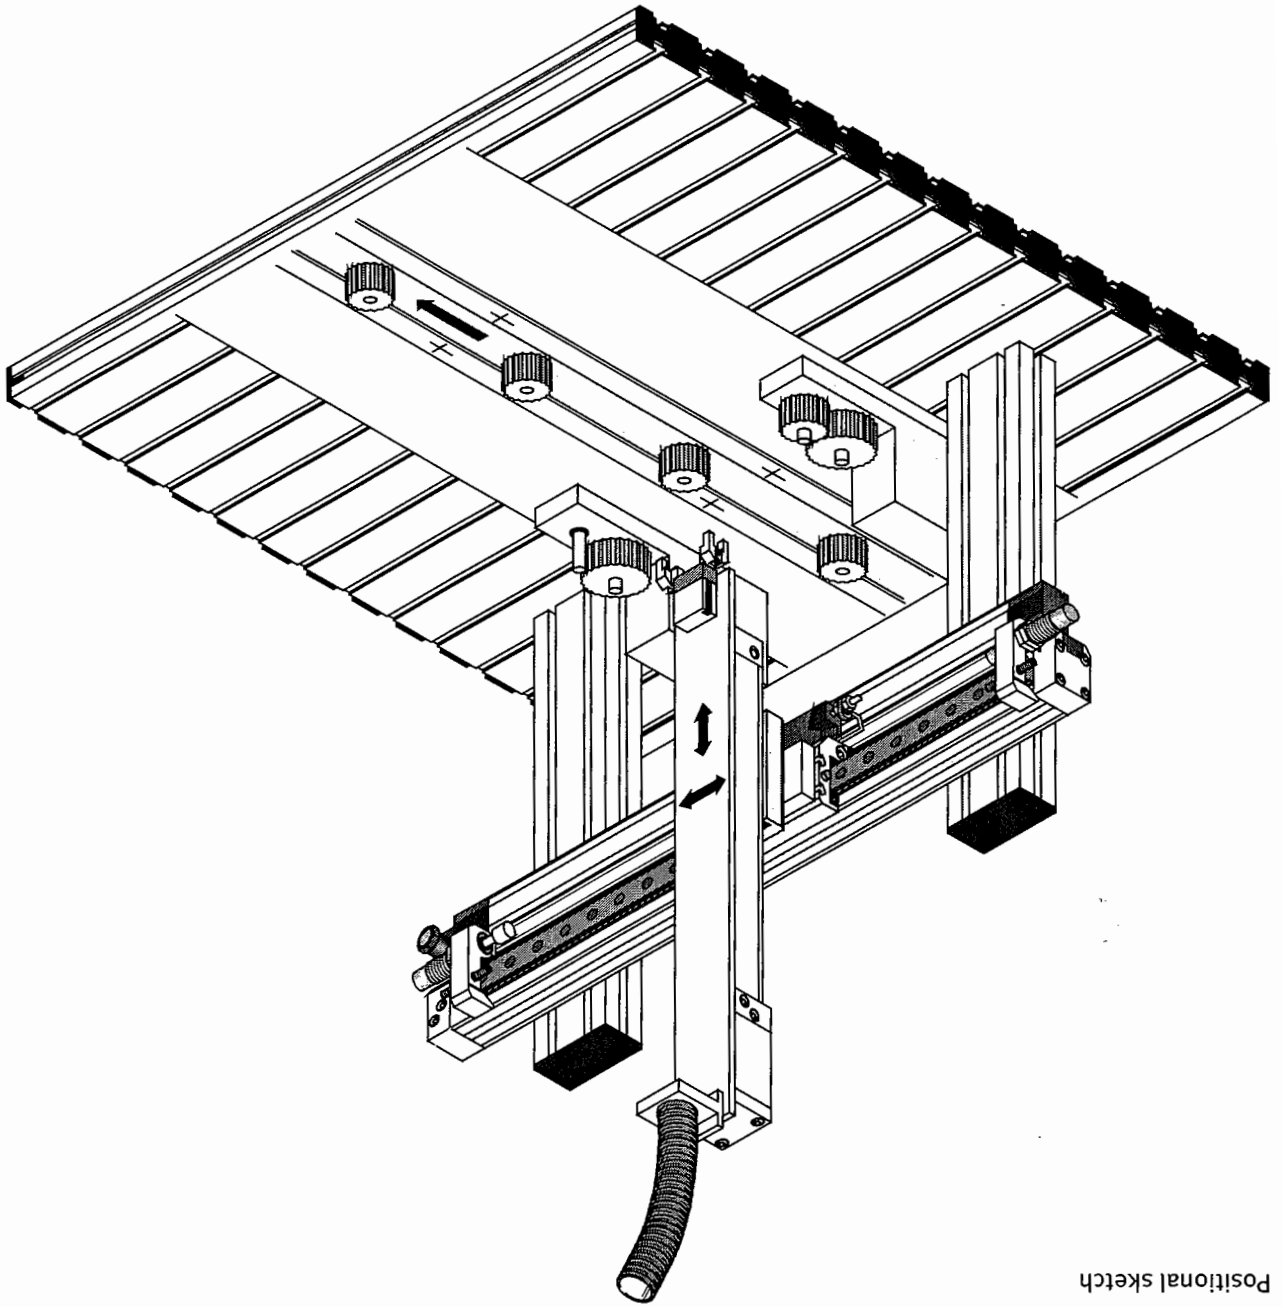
Positional sketch of the inspection device for gear wheels
